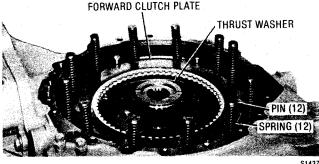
Removing adapter assembly and attached parts (TRT 2221-3, 2421-3 with overdrive)
